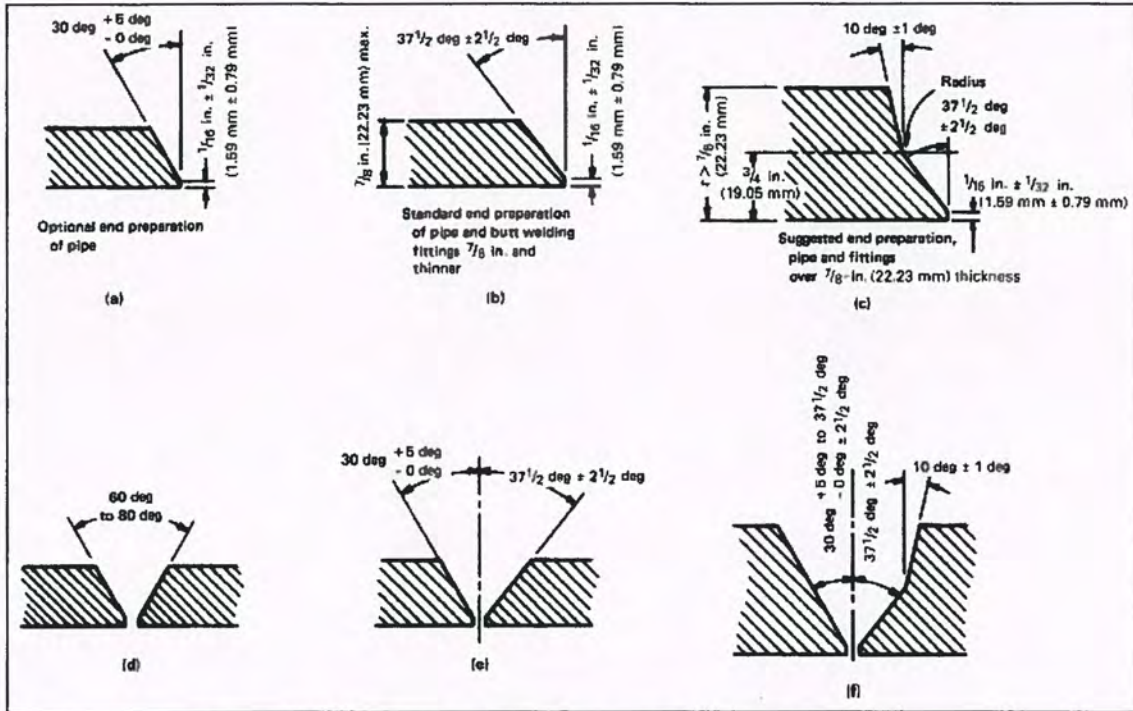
Butt Weld Joint Types for Equal Wall Thickness Components
